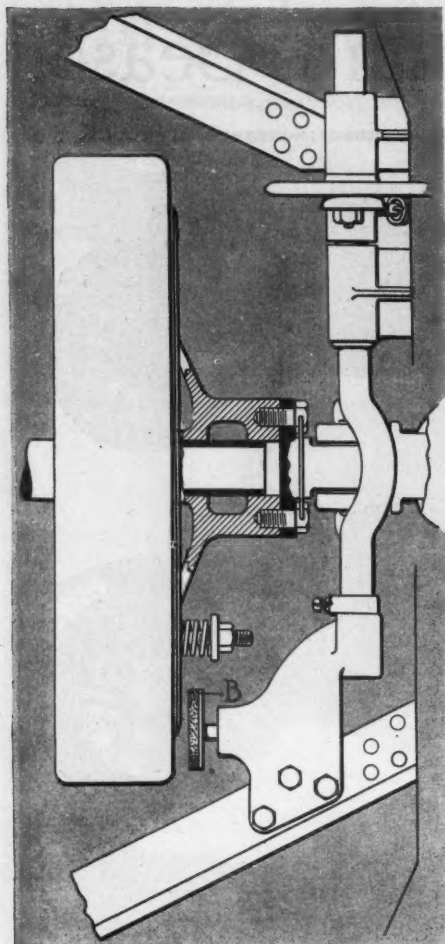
CLUTCH BRAKE. B TO PREVENT CLUTCH SPINNING WHEN CHANGING GEARS
